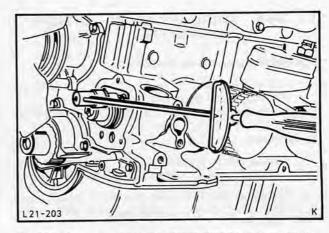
Torque auxiliary shaft thrust plate bolts as specified in Technical Data
